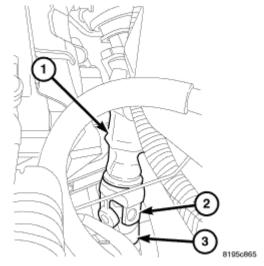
Identifying Intermediate Shaft, Coupler & Lower Coupler Pinch Bolt Courtesy of CHRYSLER LLC
